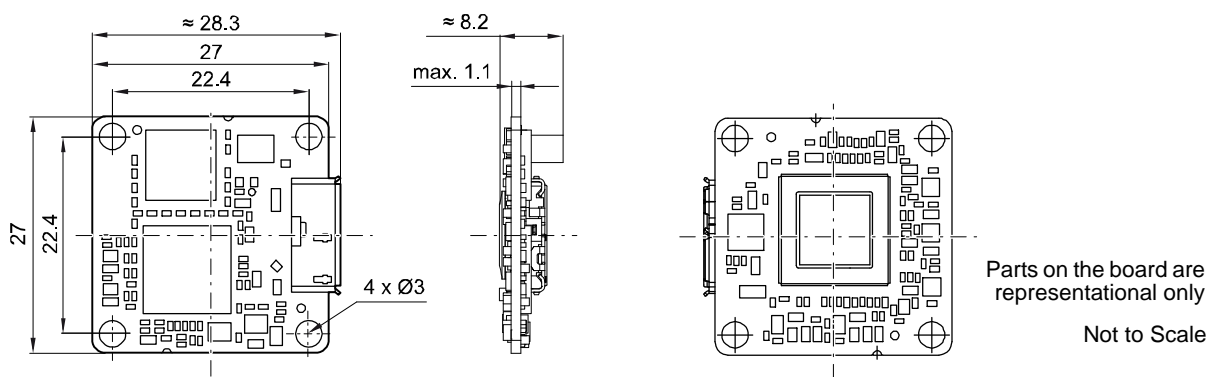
Mechanical Dimensions (in mm) for Bare Board Cameras (daA1600-60um/uc)
